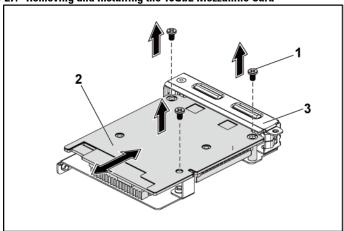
Removing and Installing the 10GbE Mezzanine Card
